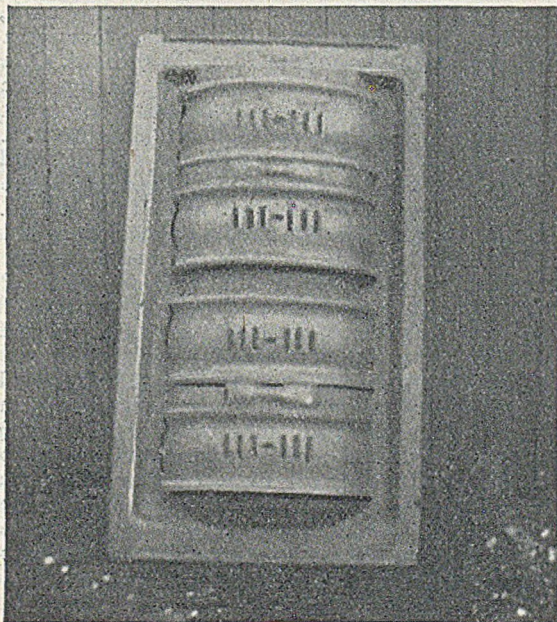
Cast-iron Patternplate, size 36 by 20 in., incorporating Four Fire Fronts.
